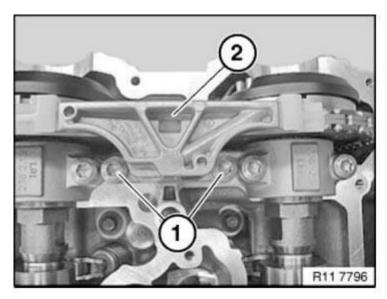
Identifying Sliding Rail And Screws Courtesy of BMW OF NORTH AMERICA, INC.
